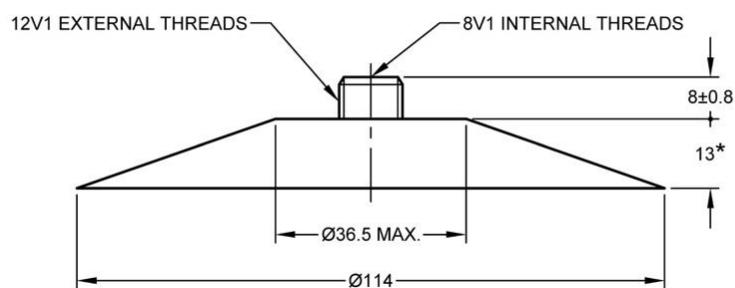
LARGE BORE SCREW-ON TUBE VALVES — (OTR) E D 4 6 32 AND E D 4 6 32 SB (FOR SIDE ELEVATION OF BRIDGE WASHER, SEE FIG. 34)
